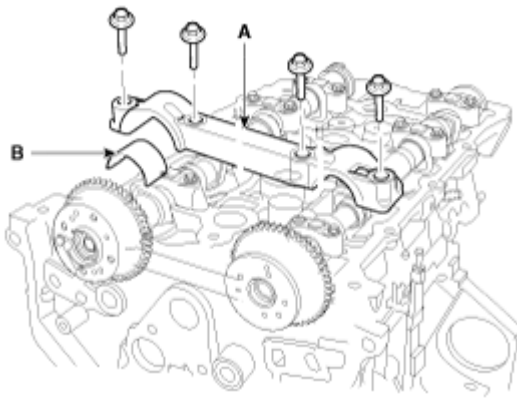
Front Camshaft Bearing Cap & Upper Bearing
